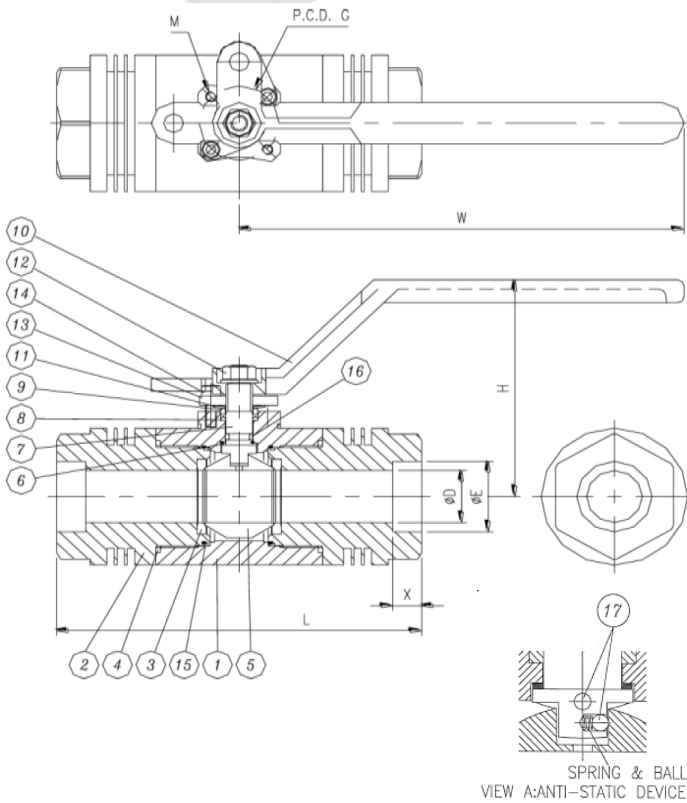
SS-LF2: 6000 WOG CLASS 2500 EXTENDED SOCKET WELD X SOCKET WELD ENDS ¼" TO 1 ½": FULL PORT, 2": STANDARD PORT ISO 5211 MOUNTING PAD NACE MR-01-75
